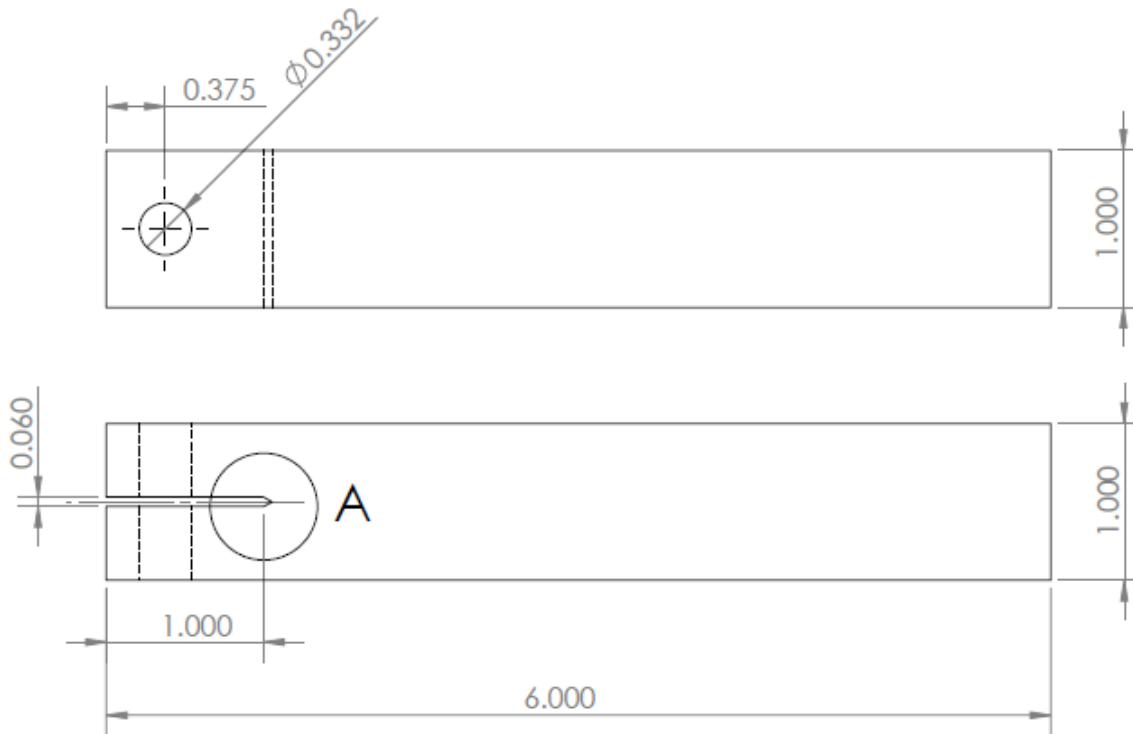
Top and side view of the plane strain DCB sample with dimensions provided in inches.
